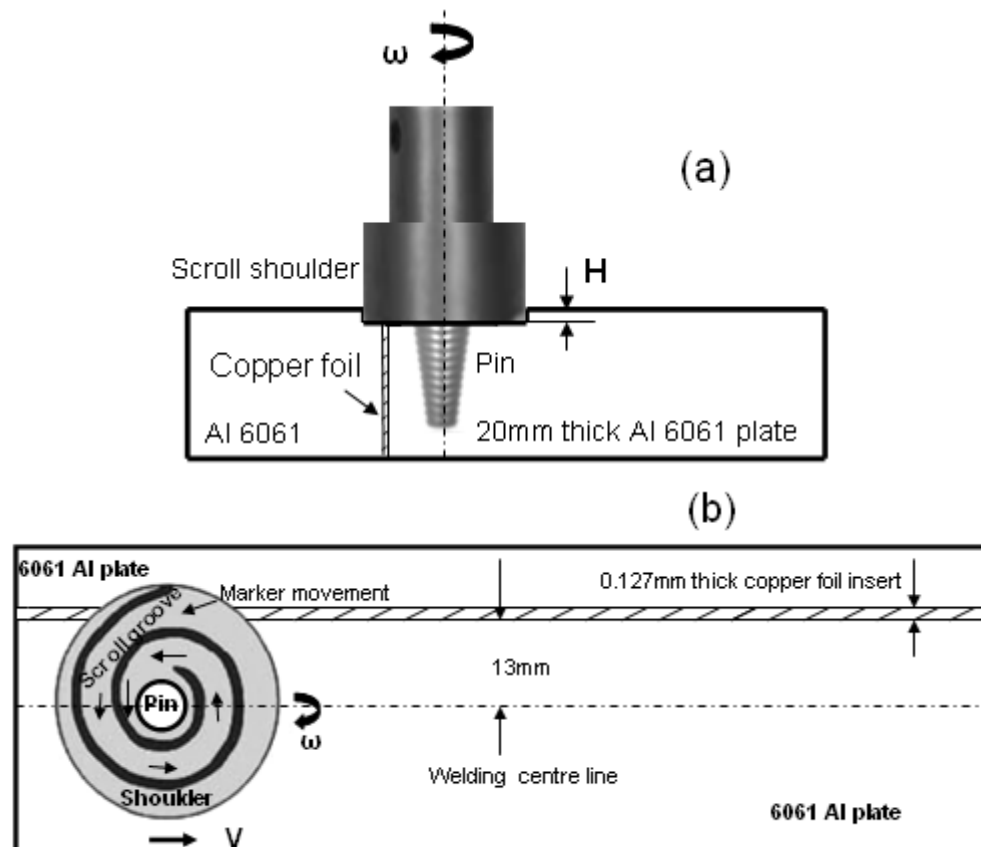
Schematic illustrations of the ‘marker insert’ experiment (trial ‘E’), the workpiece to be welded with copper foil inserted, and the direction of the marker movement, (a) viewed on Z-Y plane, (b) viewed on X-Y plane, with welding direction parallel to X axis
